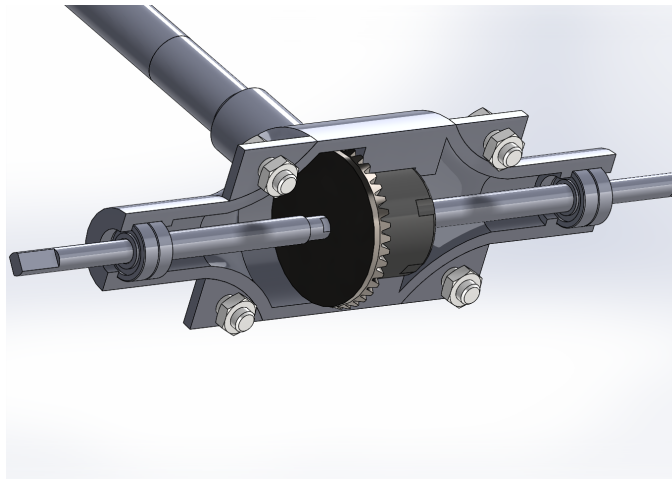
A section view of the differential housing showing the differential, the shafts used to move the wheels, and bearing that support the shafts.
